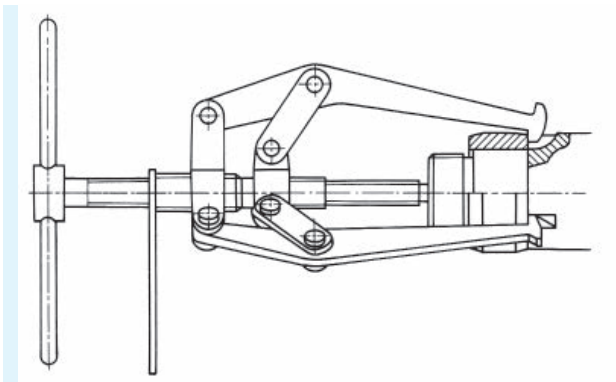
Dismounting of cylindrical roller bearing inner ring using puller
